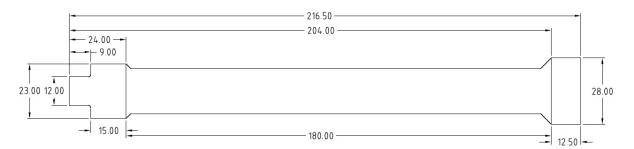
ETAL6 Rev. A, Rev. B detailed dimensions
